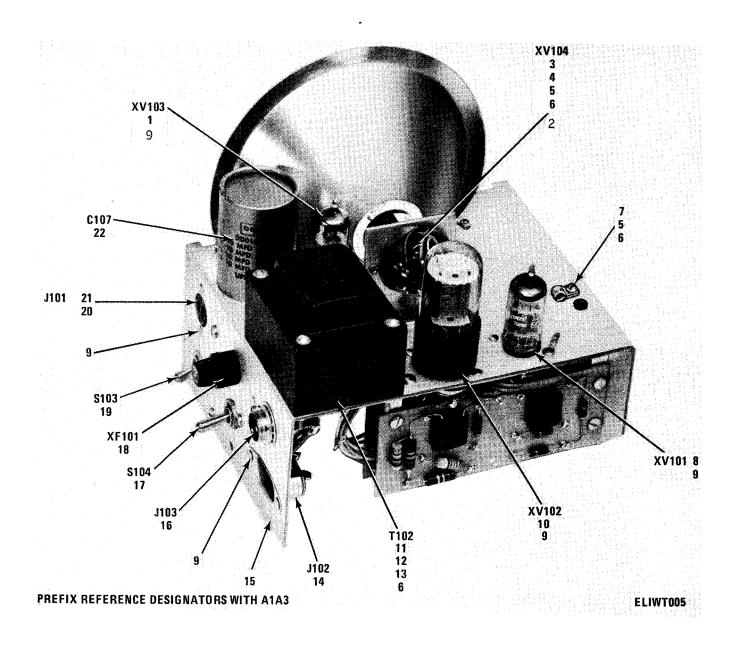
$\bigcirc$  . Chassis assembly (Sheet 1 of 2)
